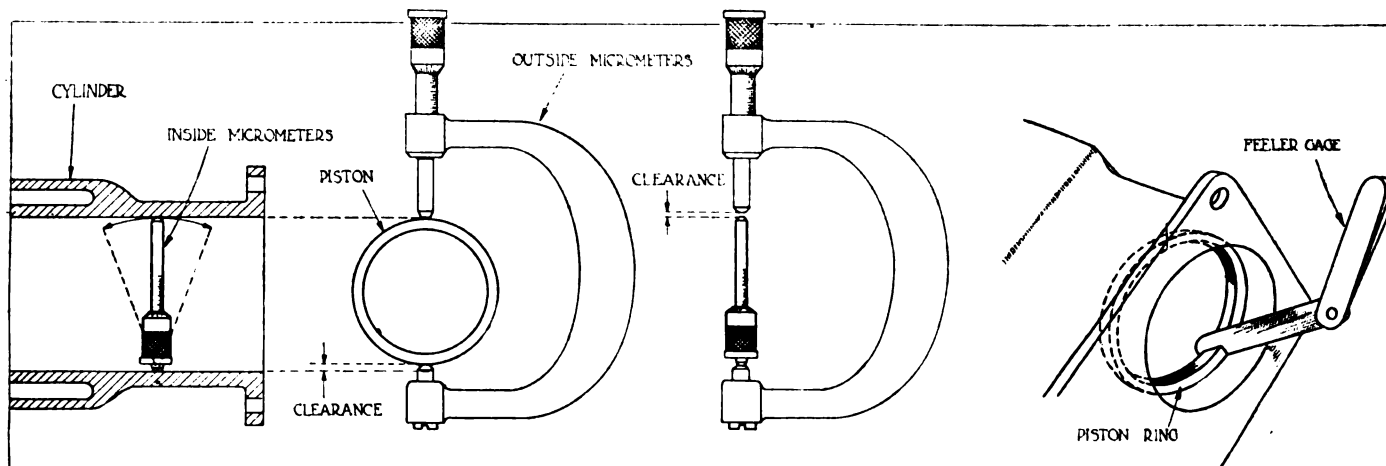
Left—Proper clearances must be observed in fitting alloy pistons, and this is the manner of measuring that clearance. Fig. 3—Right—It is essential that the rings have the proper clearance at the ends, and the amount is measured by a feeler gage after the ring has been squared up in the cylinder it is to occupy
